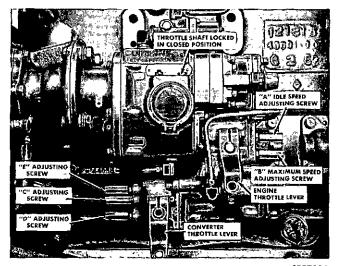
Adjustment points -- torque converter governor, PT (Type R) fuel pump
